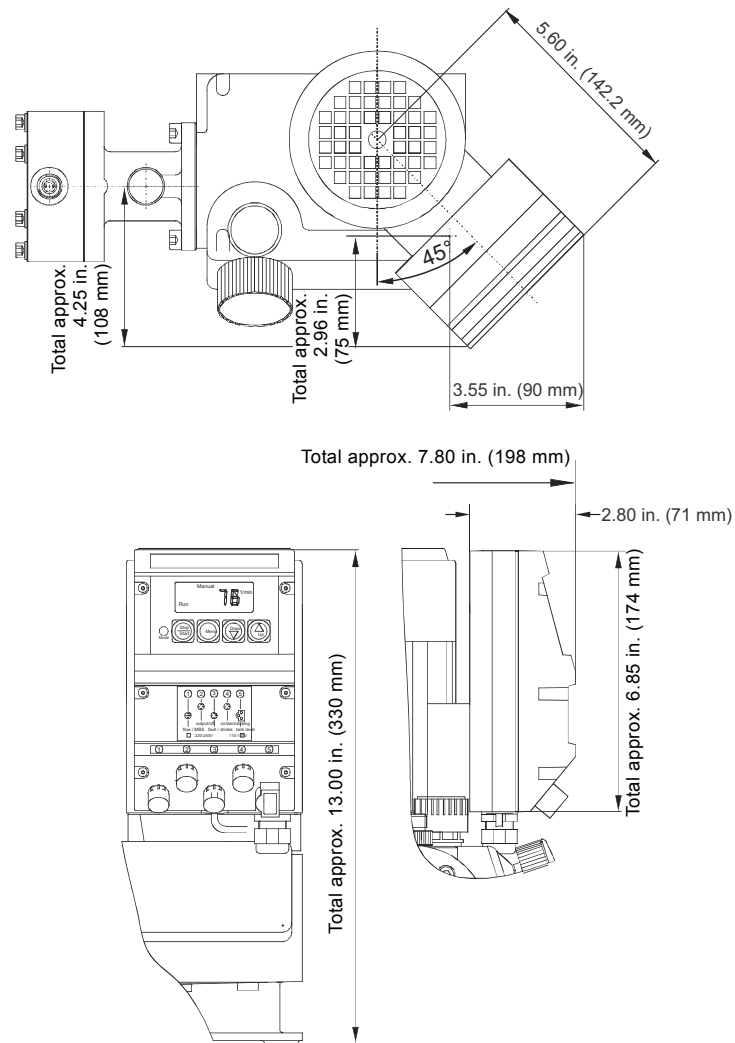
Dimensions, AR control unit (mounted on DMH)
